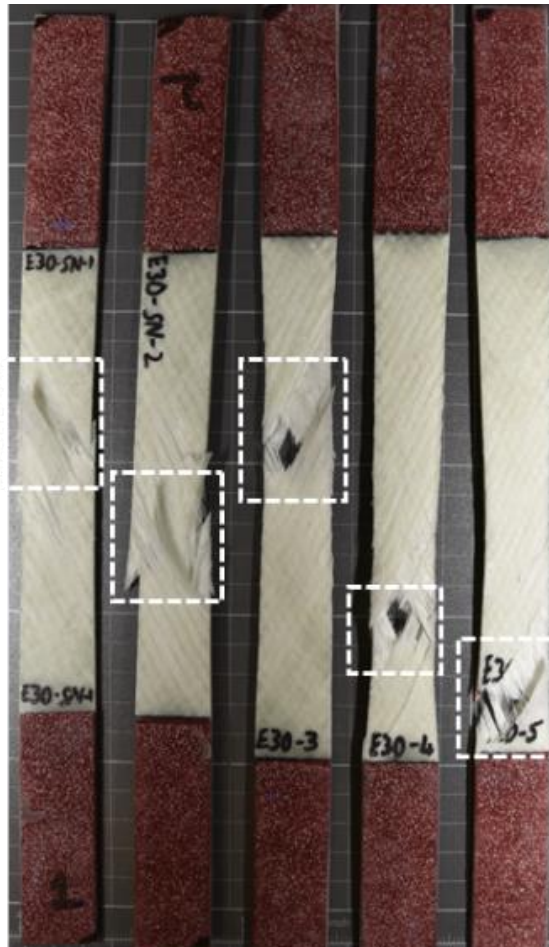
4I GF/Elium $\pm 30^\circ$ fatigue test specimens after failure with location of final failure indicated on the specimens.
